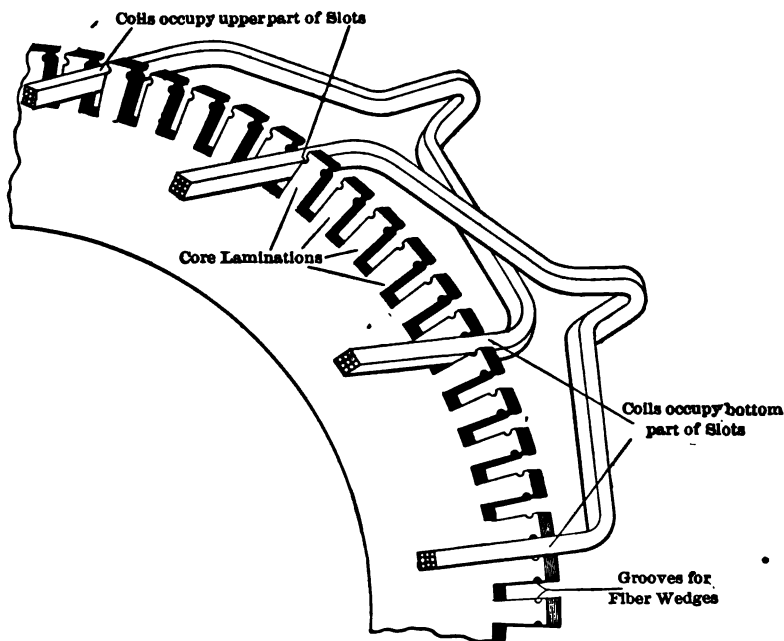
End connections in a double-layer coil winding (barrel winding).
